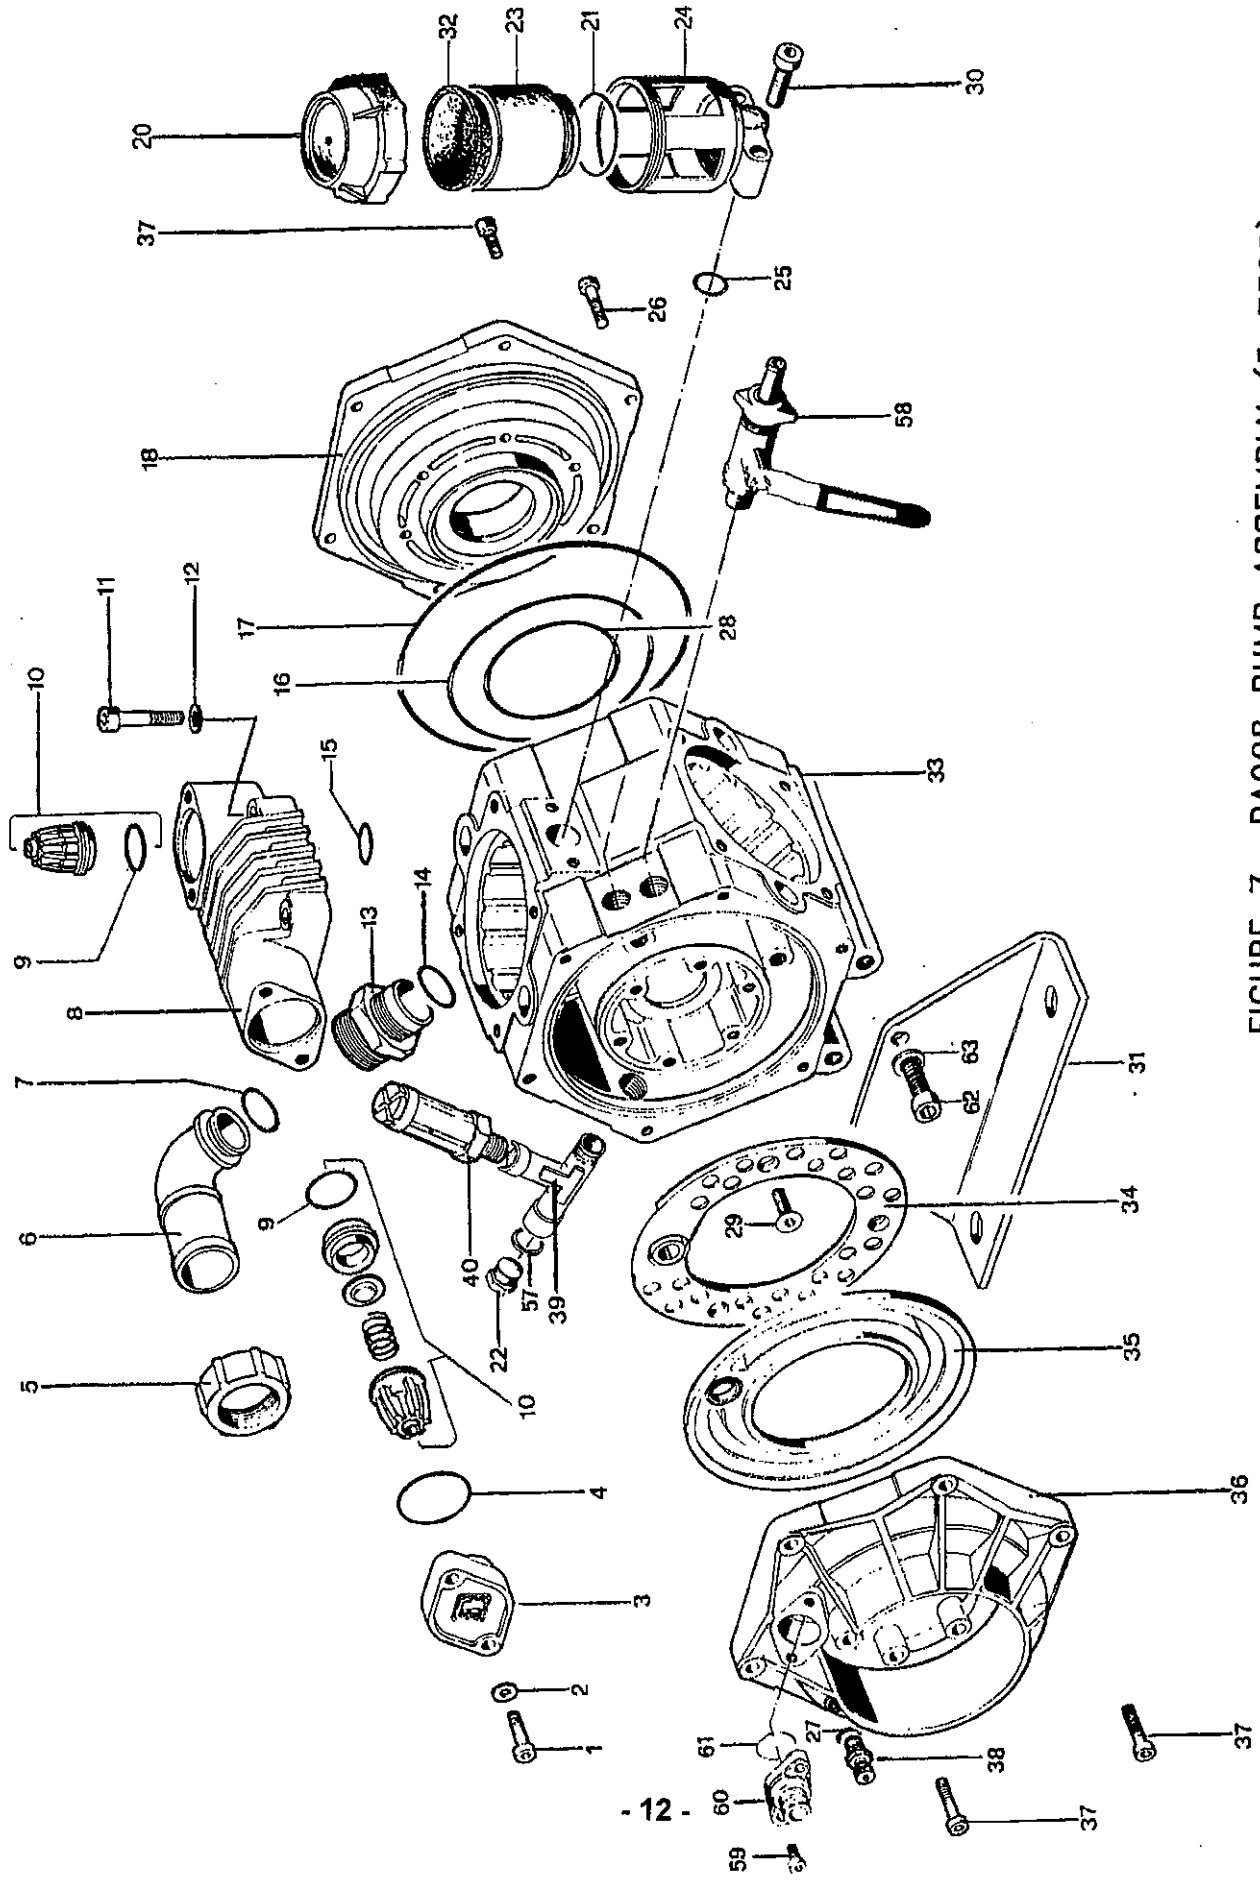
PA908 PUMP ASSEMBLY (3-7328)
